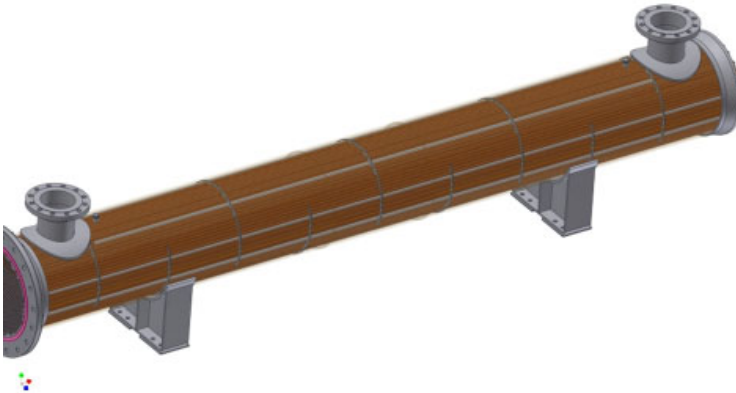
One of the evaporator sections – evaporator filling with a tubular segment
